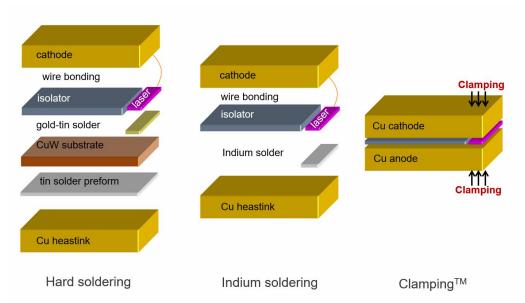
An illustration of the existing laser bar mounting processes: (a) hard soldering (using CTE matching materials), (b) Indium soldering (also called soft soldering; using an indium layer), (c) Monocrom's patented mounting technology: ClampingTM (solder free process).
